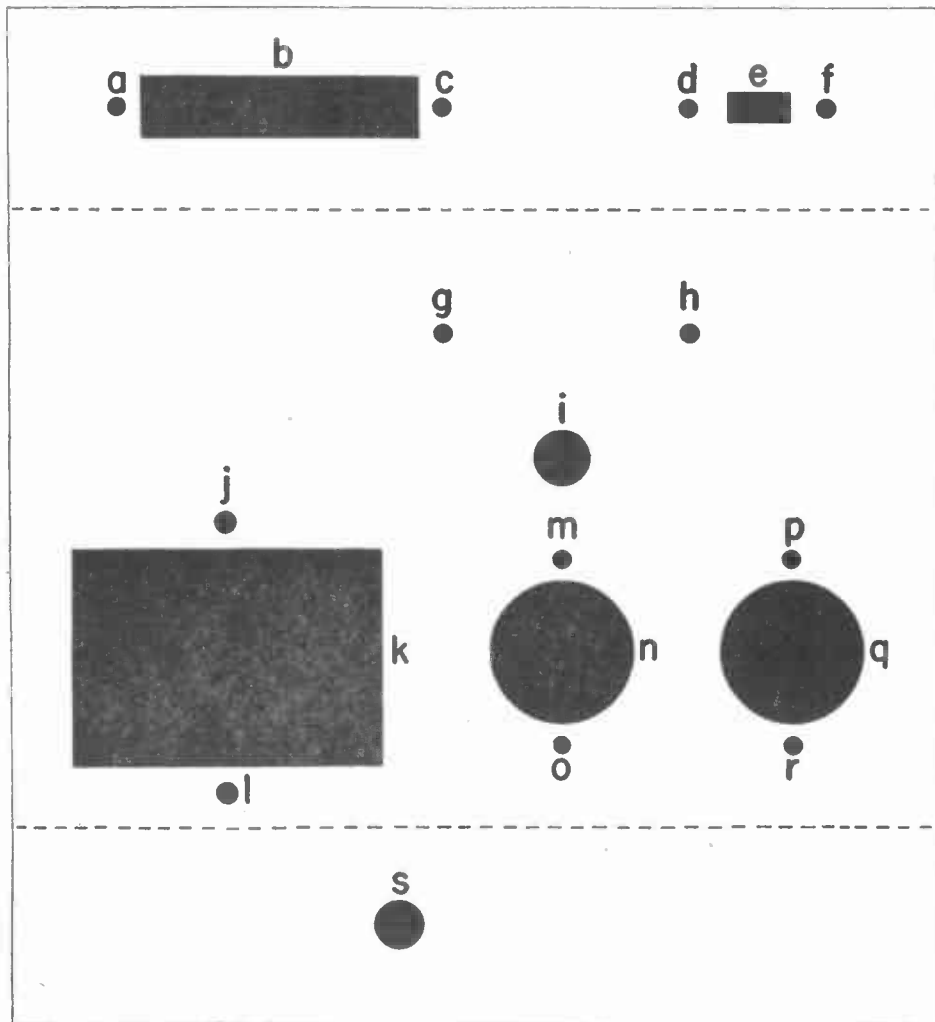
Chassis layout diagram for the a.c. power pack, drawn to show what you would see if you looked at the bottom of the chassis while it was a flat sheet (before bending the sides). The holes are lettered here merely for your convenience in locating on your own chassis the correct mounting holes for the various parts; do not mark the holes in this manner on your chassis, for this diagram is entirely sufficient for assembly purposes.
